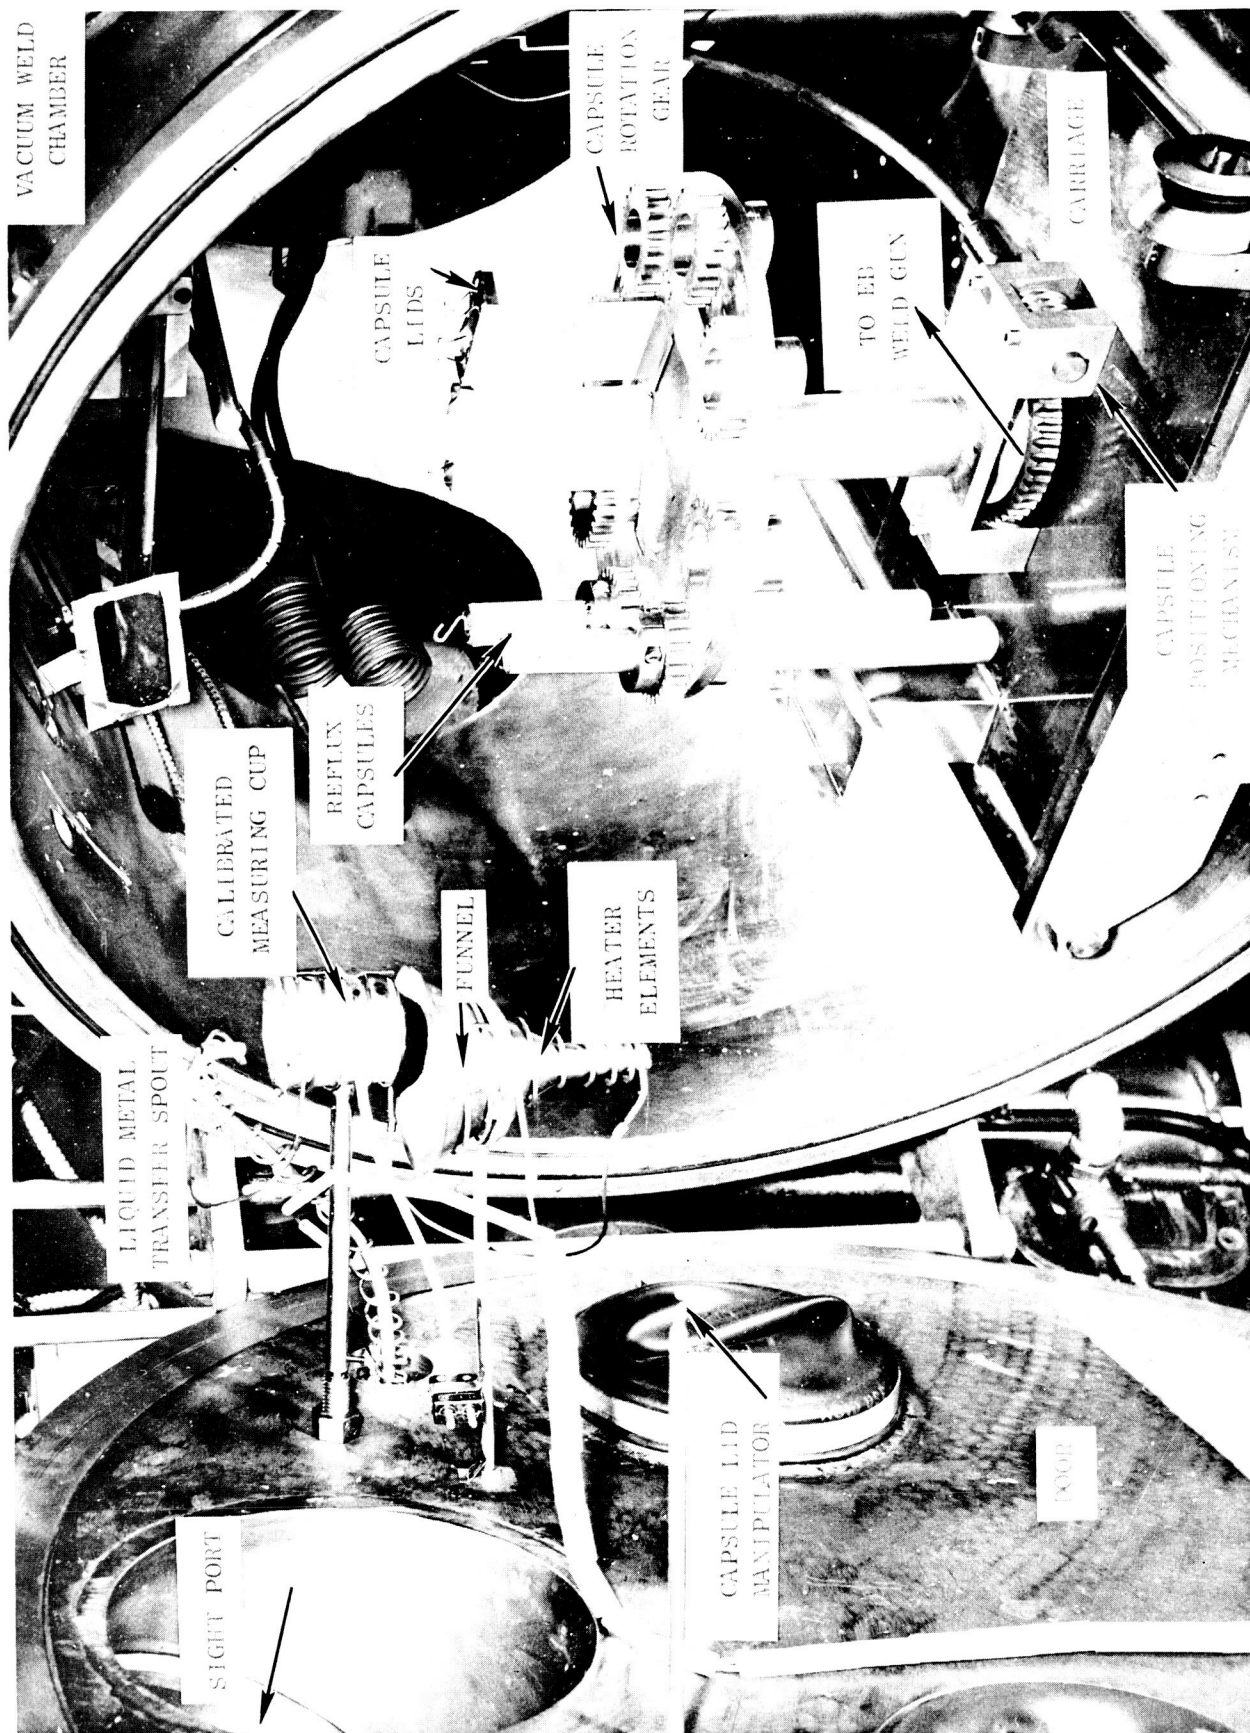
Internal View of the Capsule Loading Facility with the Chamber Door Open. Following Loading of the Capsules with Potassium the Carriage is Moved to the Electron Beam Welding Station at the Other End of the Chamber. (C63041622)
